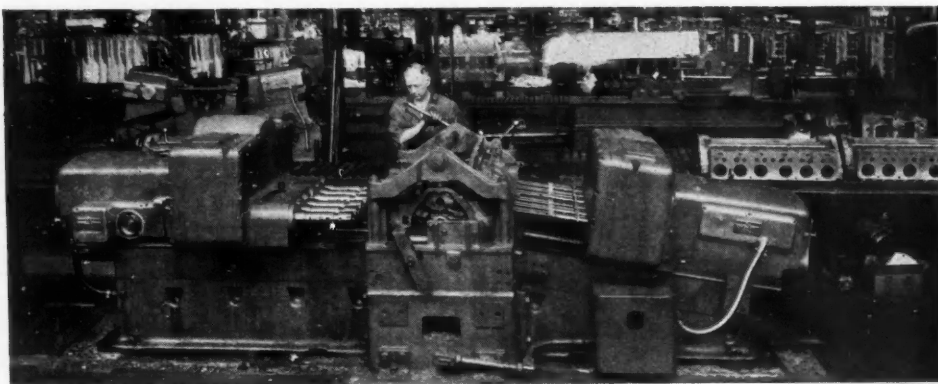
Three separate set-ups per day on this two-way, 18-spindle machine. Left hand head bores and counterbores the pilots for the wet liner; later bores the grooves for the rubber packing; and finally, finish-bores and finish counterbores the cylinder sleeve pilots.
